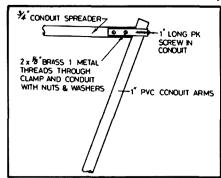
Side view of quad arrangement for clamping PVC conduits together. 24 gauge galv. iron or brass strips for clamps, see Fig. 8.
